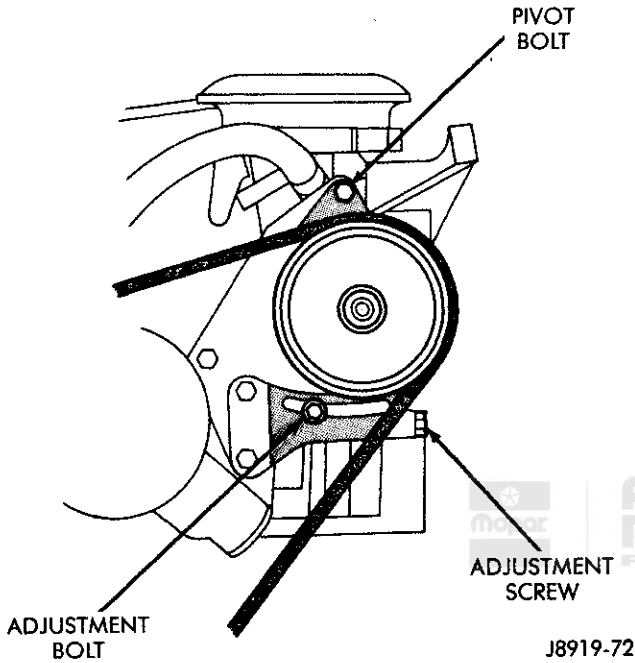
Serpentine Drive Belt Adjustment — 2.5L/4.0L
